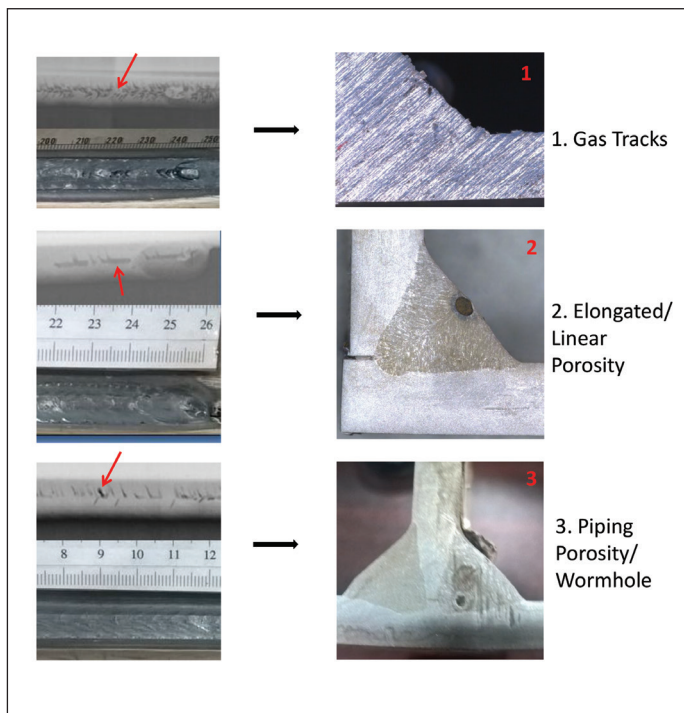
Macroevaluation of some welds with porosity.
